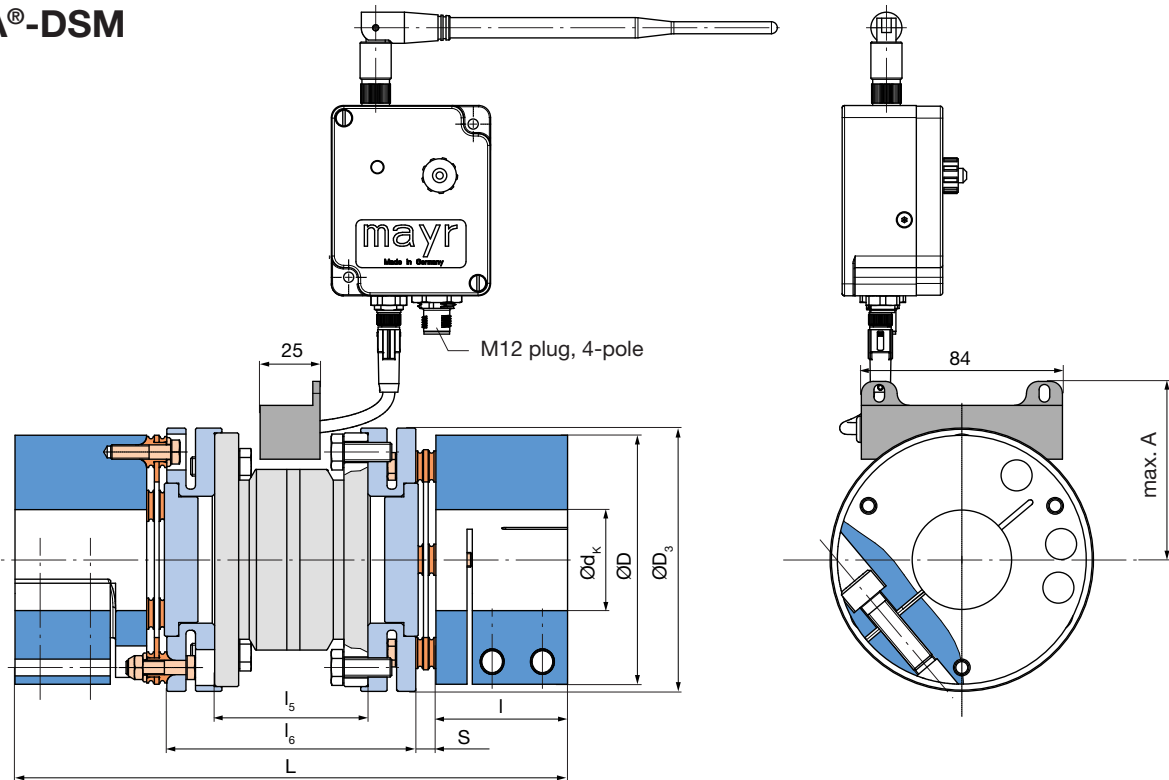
Type 971.555 (for other mounting variants, see pages 28 – 44)
